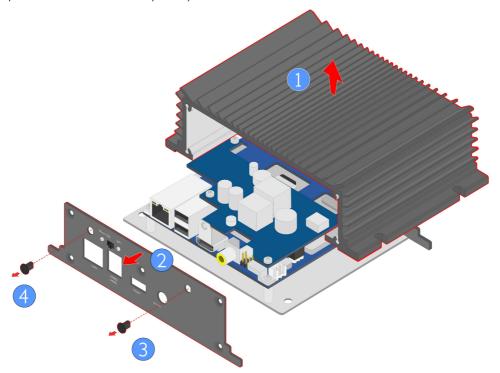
Removing the top cover chassis, back panel plate, and antenna holes cover
